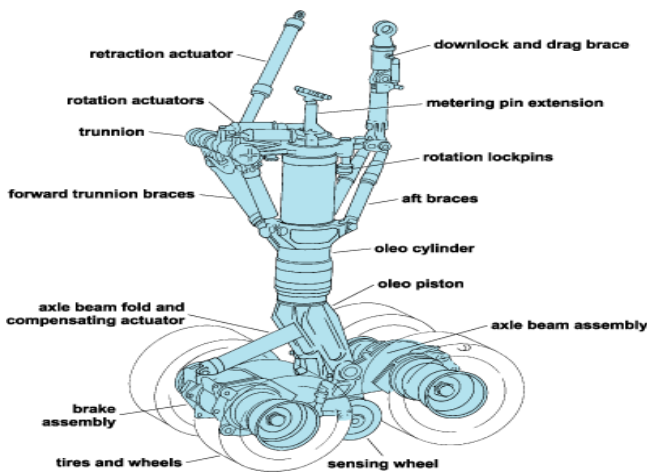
Example Main Landing Gear (Landing Gear parts, 2015).
